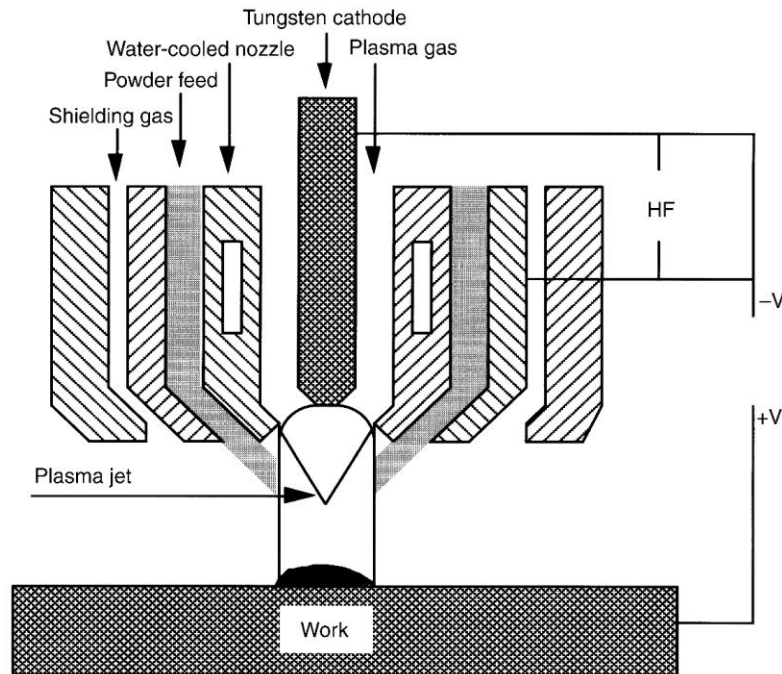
Schematic illustration of PTA welding process [9].
